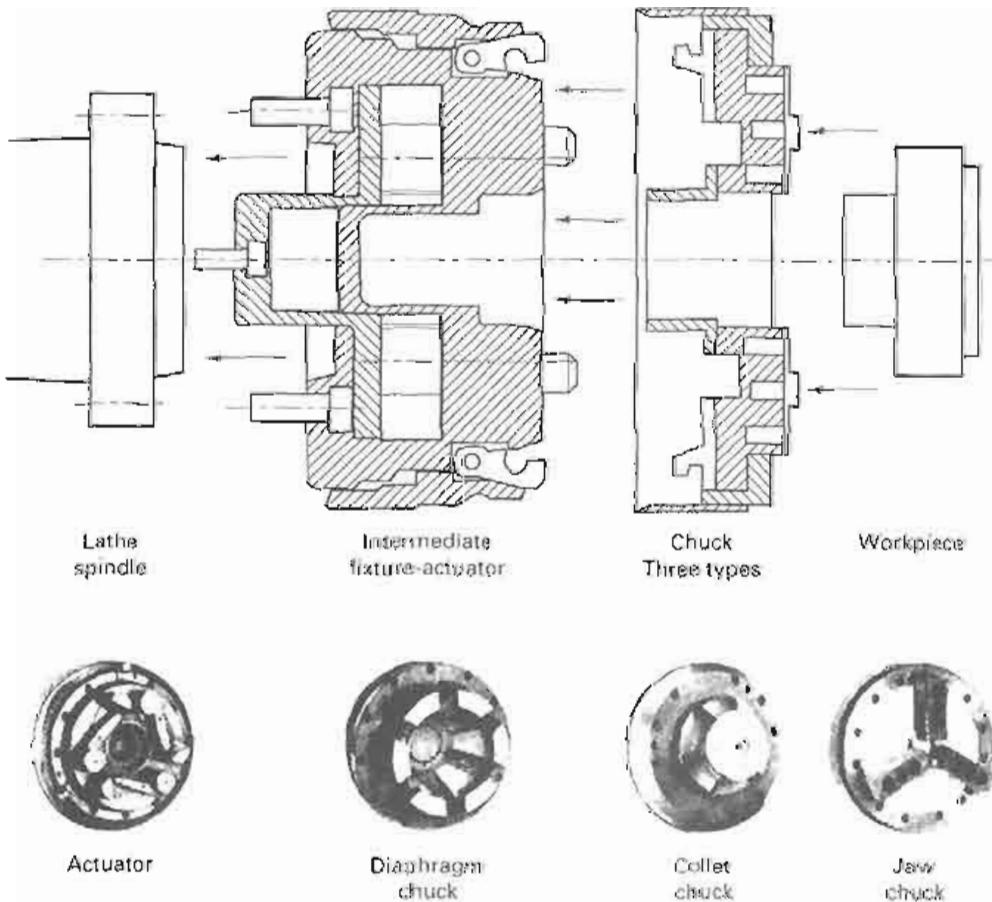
Example of the intermediate jig concept applied to lathe chucks. The actuator is mounted on the lathe and can quickly adapt to three different chuck types. (Courtesy of Sheffer Collet Company.)
